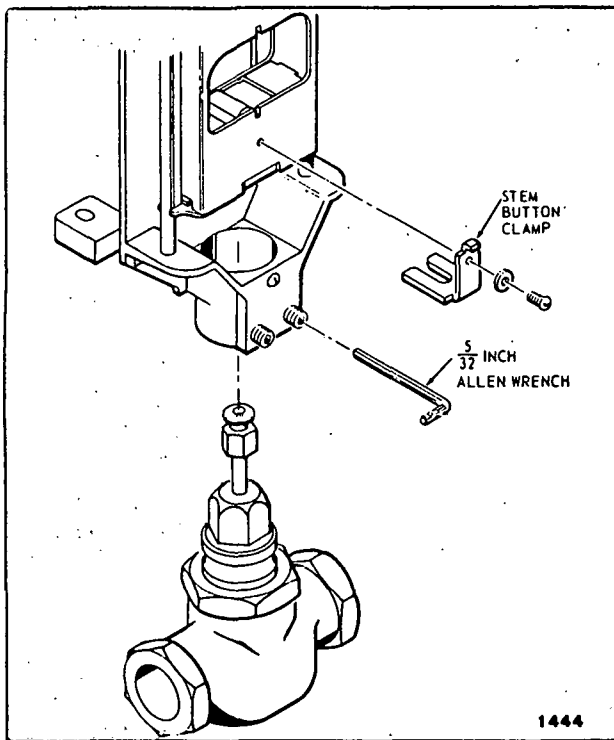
ASSEMBLY OF THE LINKAGE TO THE VALVE.
